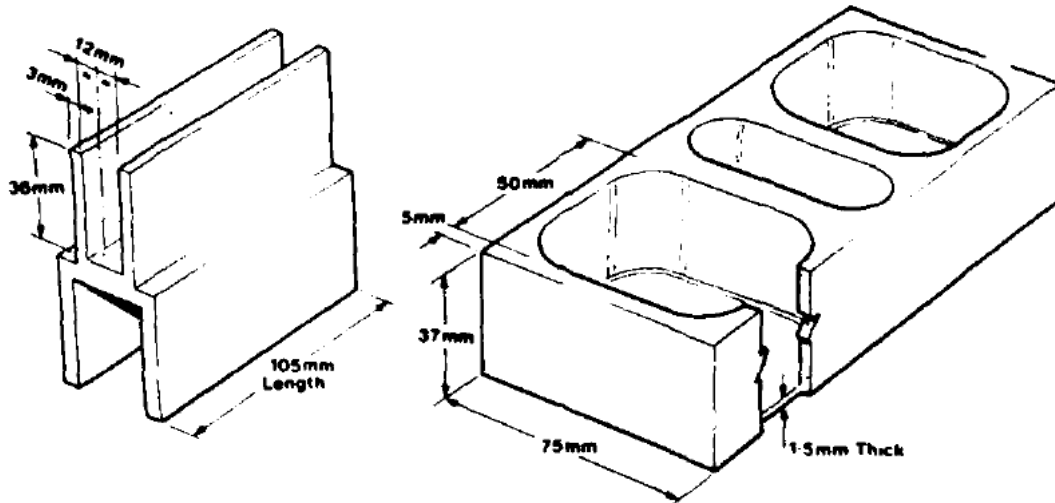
The examined pieces 8090 and alloy L93 components [62]
